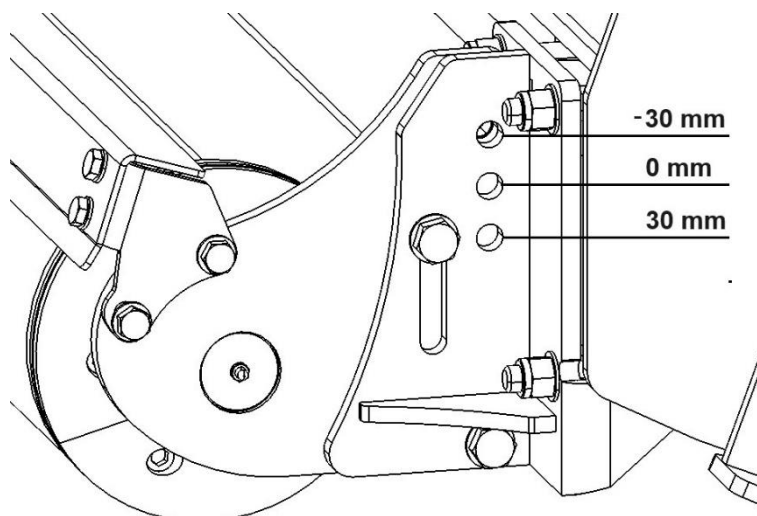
Approximate cutting height depending on the selected adjustment hole of the following roller
